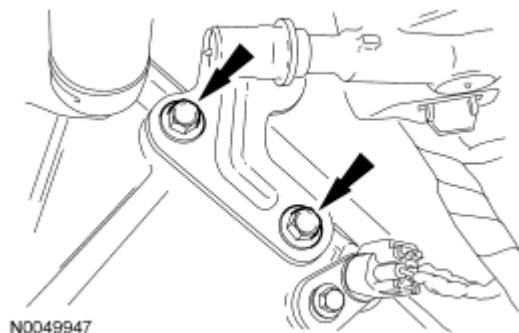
Locating Power Steering Reservoir Bracket Bolts
